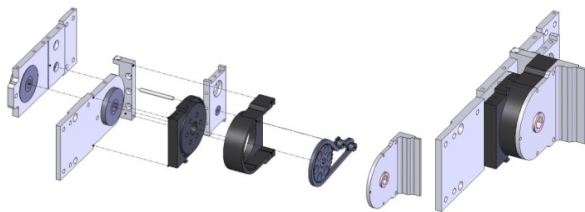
Body flexion joint design, shown in exploded view (left) and assembled (right).
